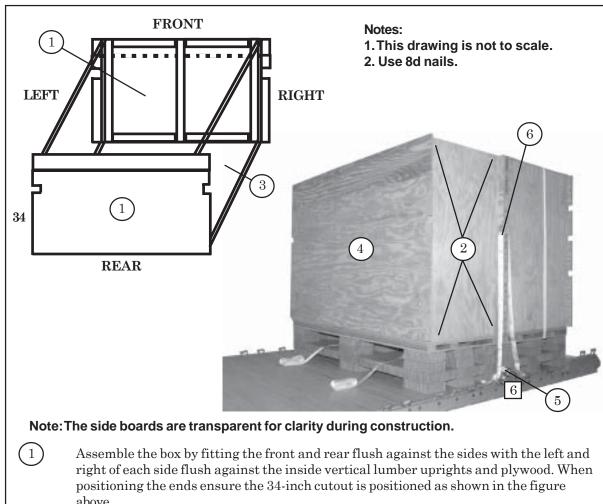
Equipment Box 2 Sides, Top and Bottom Constructed
